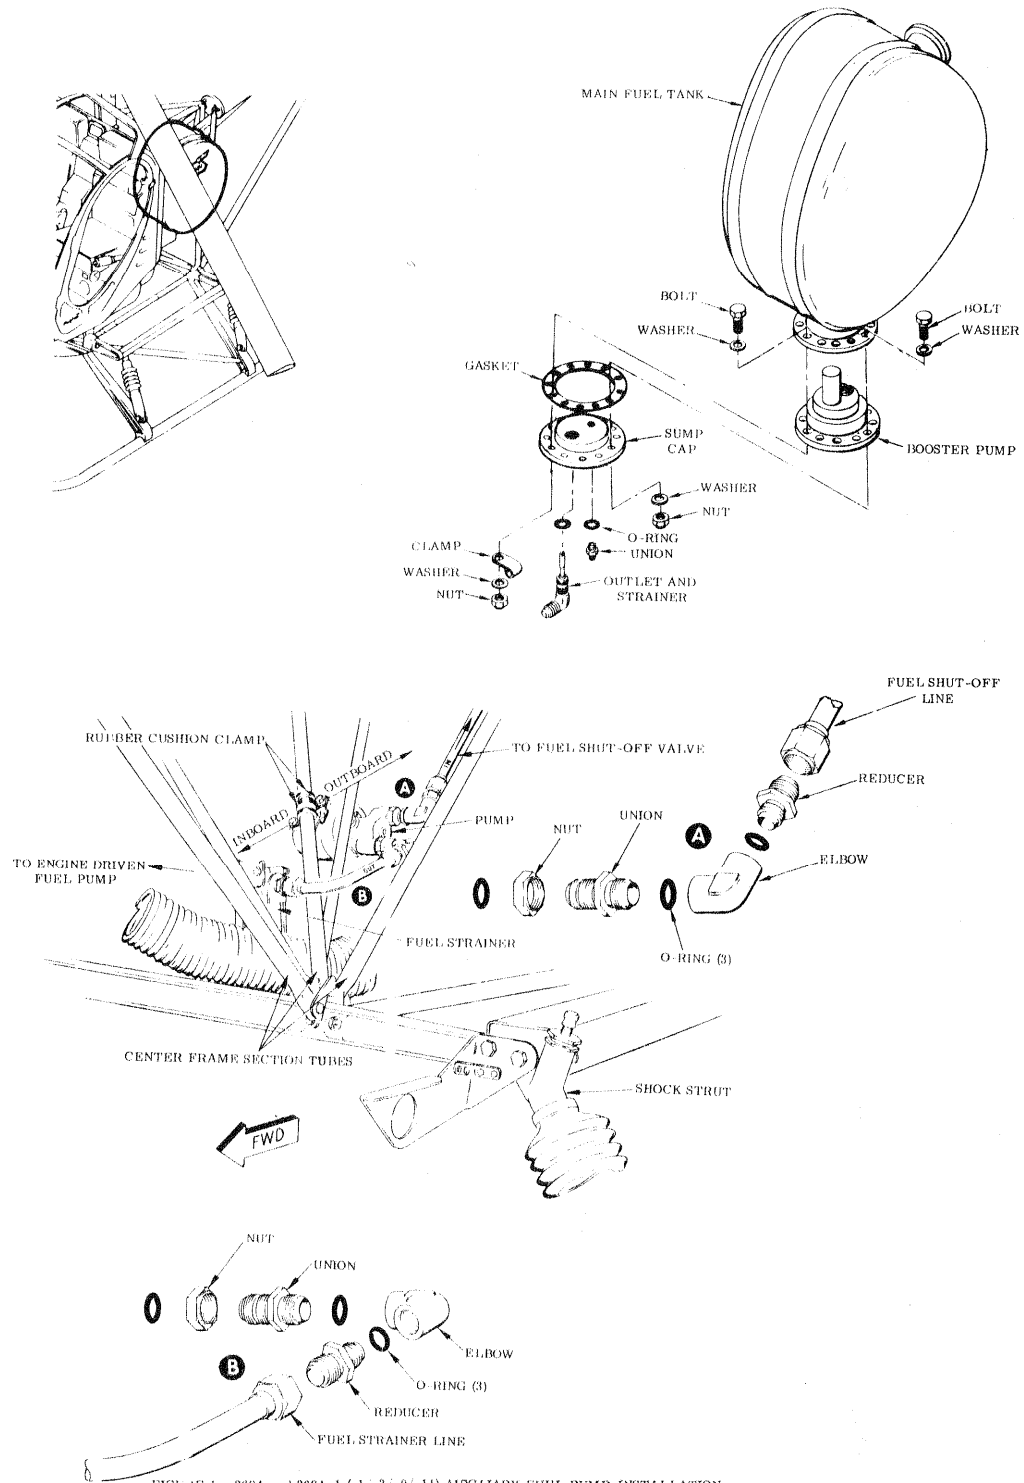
269A and 269A-1 (-1/-3/-9/-11) AUXILIARY FUEL PUMP INSTALLATION
